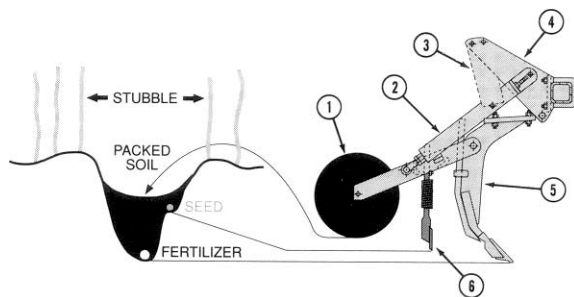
Opener Assembly: 1) Press Wheel, 2) Press Wheel Cushion Spring, 3) Compression Spring, 4) Frame Mount, 5) Fertilizer Opener Shank, 6) Seed Opener.
